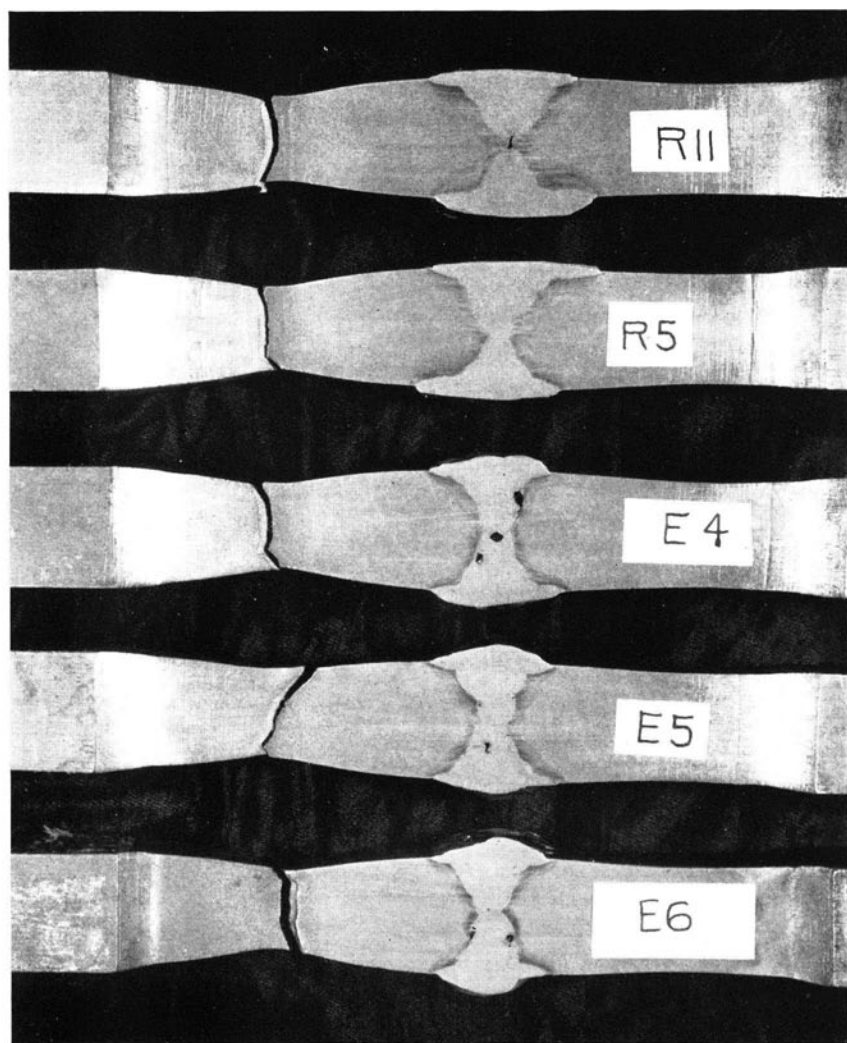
STATIC TENSION SPECIMENS AFTER FAILURE
